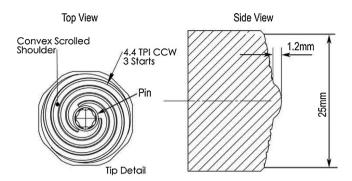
Detail of the PCBN tool used for welding.
